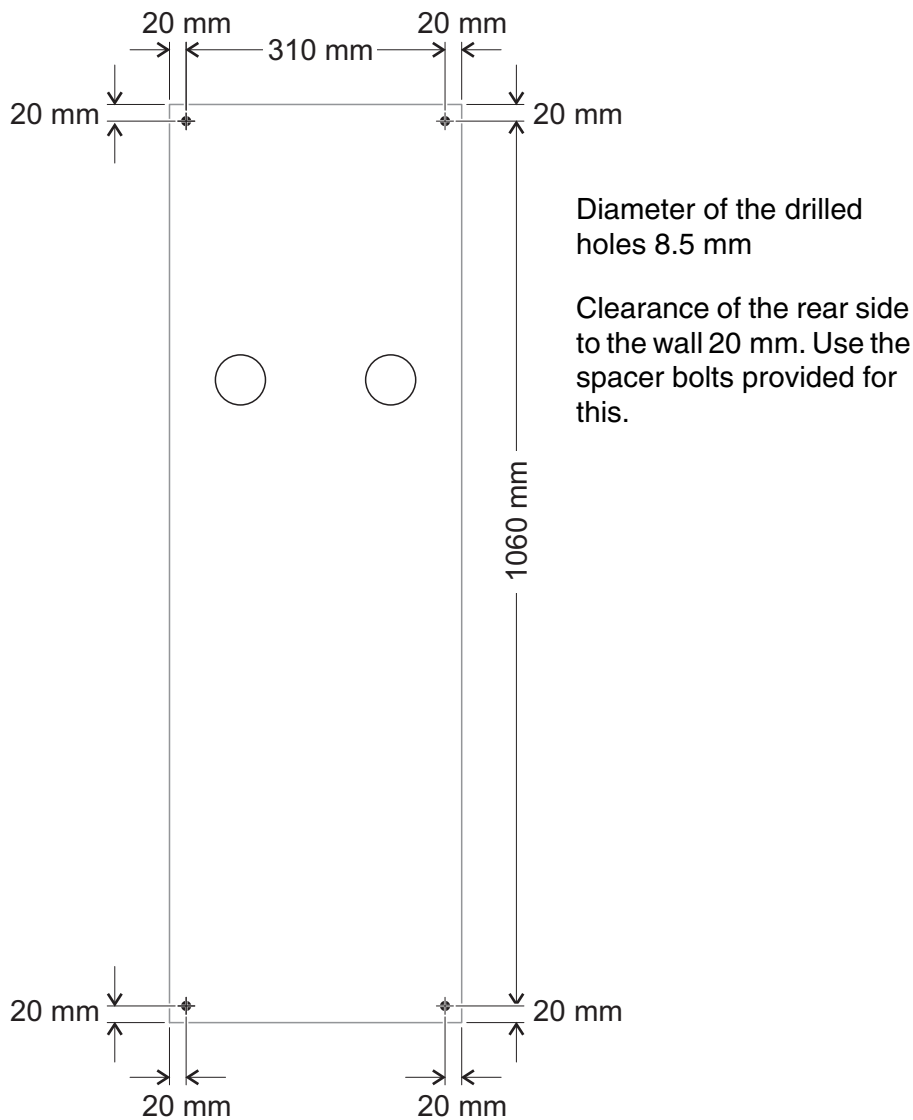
Drilled hole distance for the drinking water panel (dimensions in mm)
